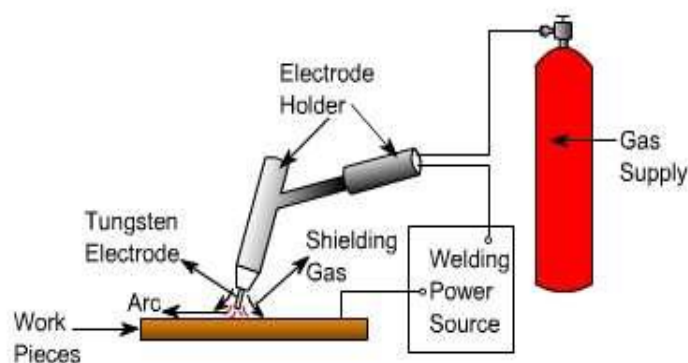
Schematic Diagram of TIG Welding System or set up
